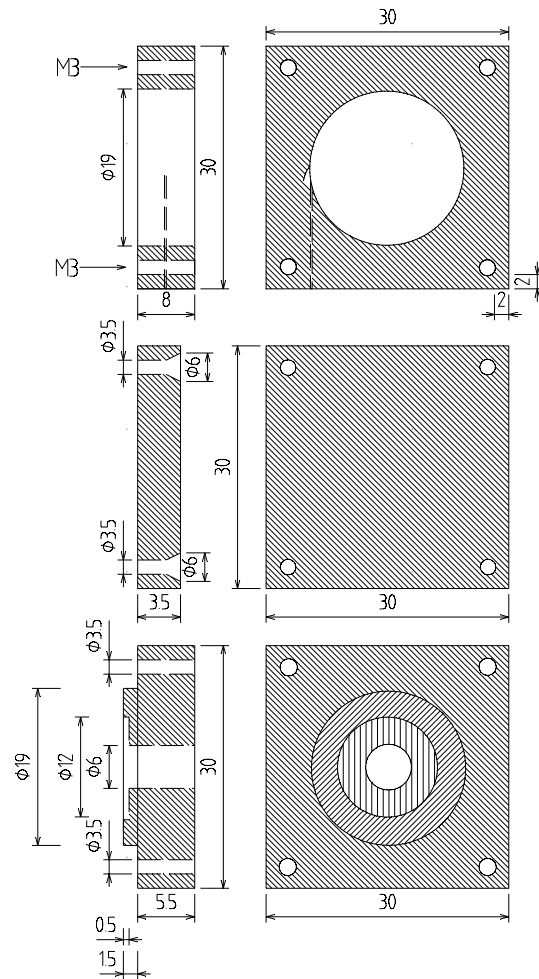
Design drawing of the single-crystal ball mill. Dimensions are given in mm. Brass was used as the standard material. The air stream input was optimized by a welded tube connection.
